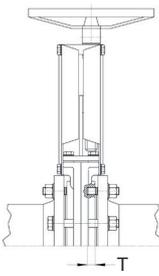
Assembly of the VAG ZETA® Knife Gate Valve
